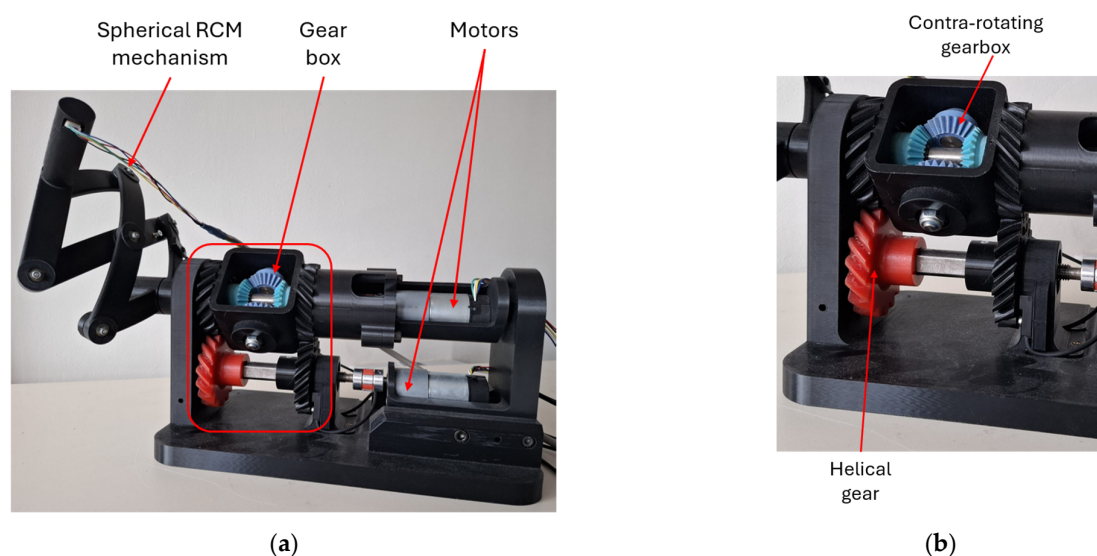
Final prototype and gearbox detail: (a) assembled robotic prototype; (b) detail of the contra-rotating gearbox.
